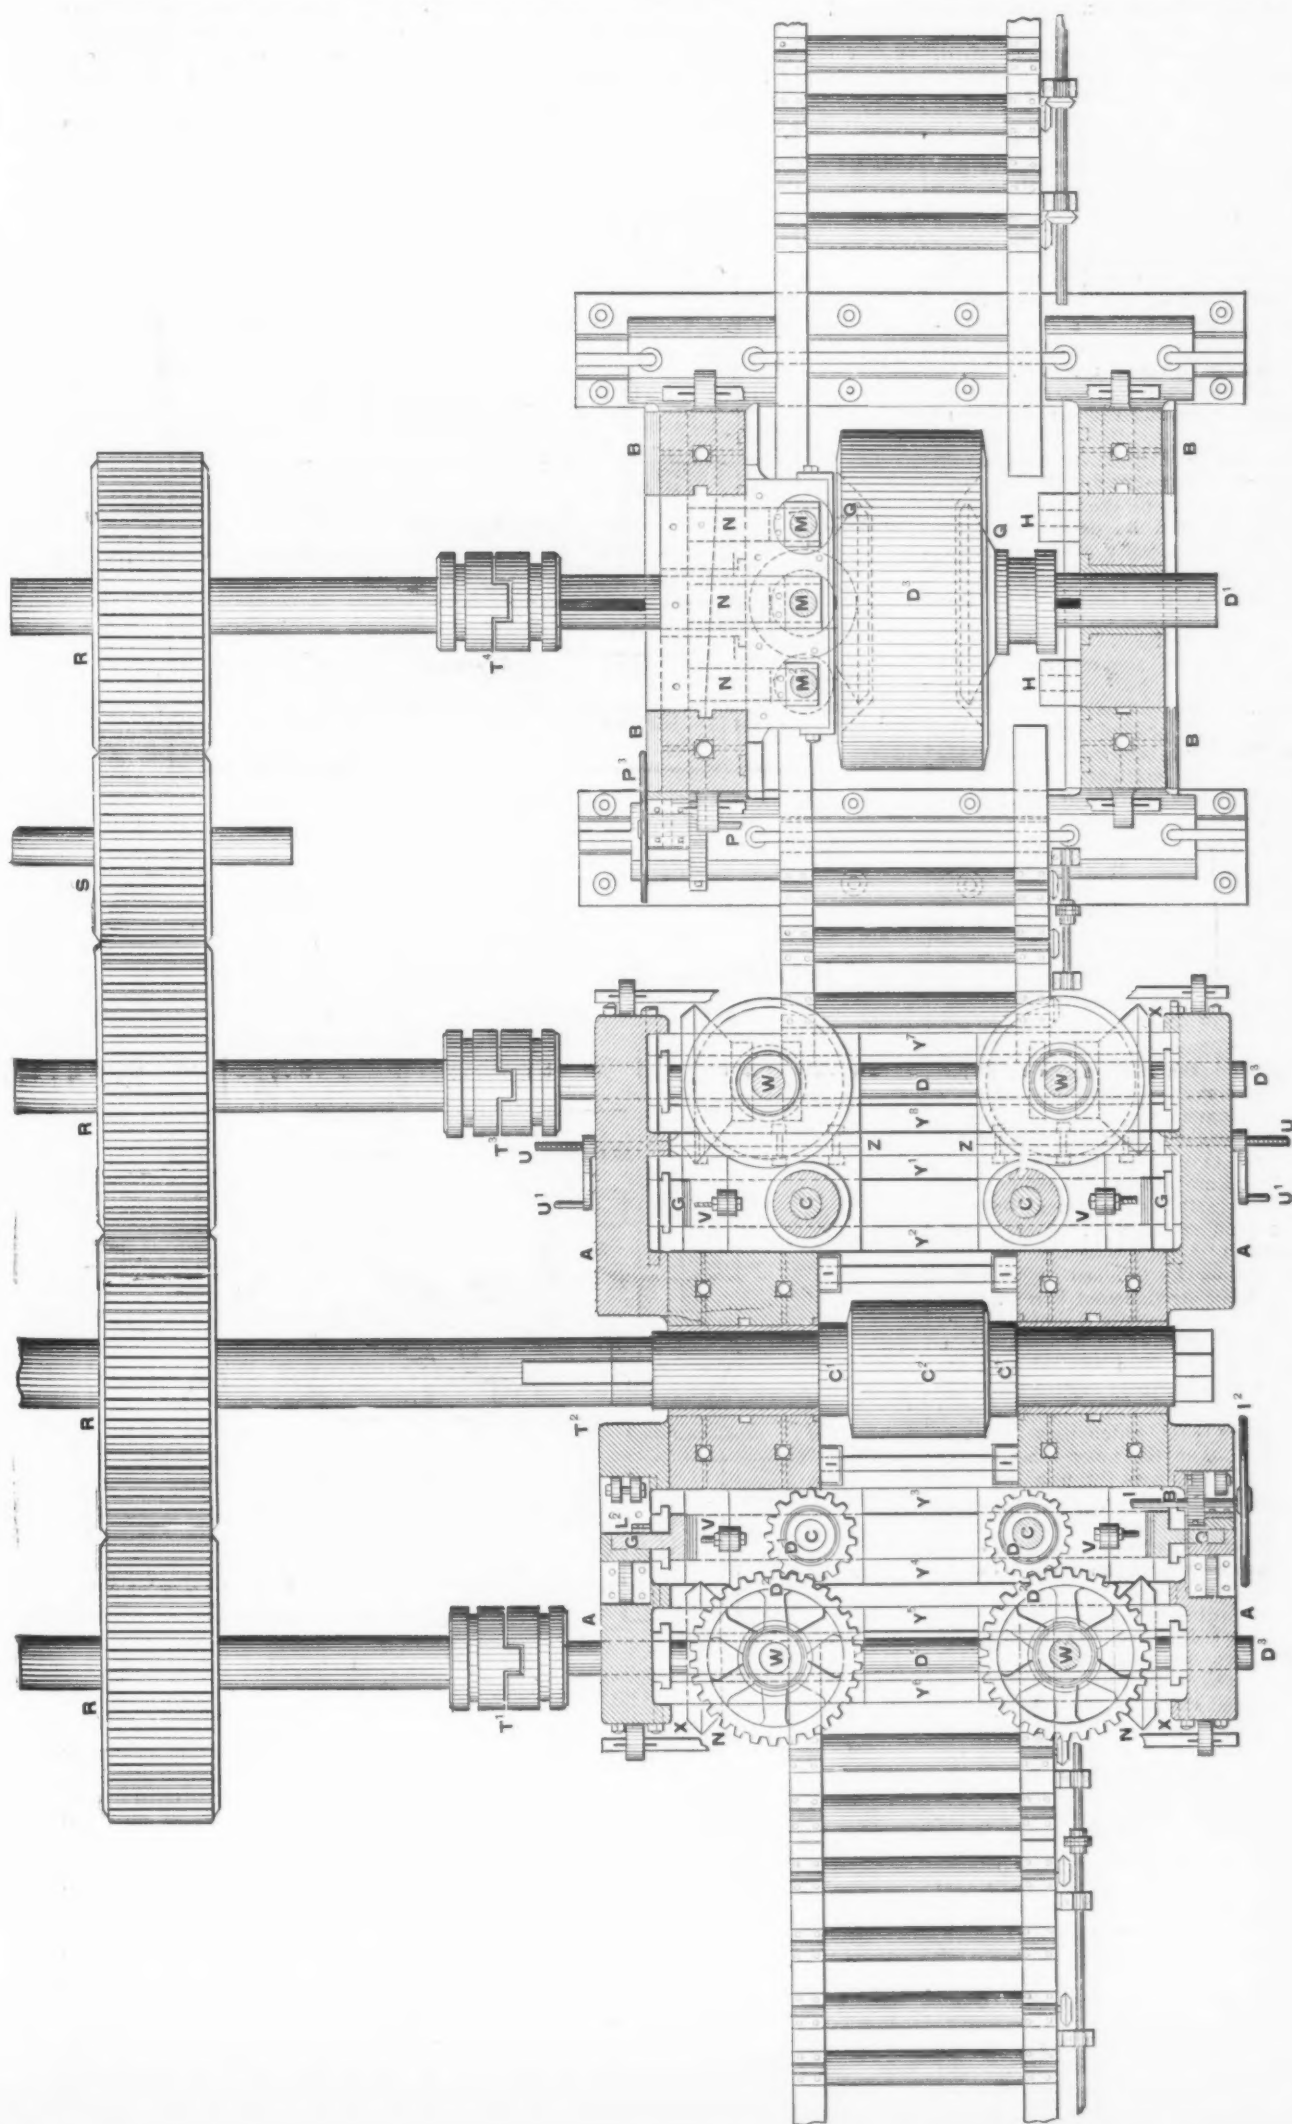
Horizontal Section of Reese Universal Beam Mill.
